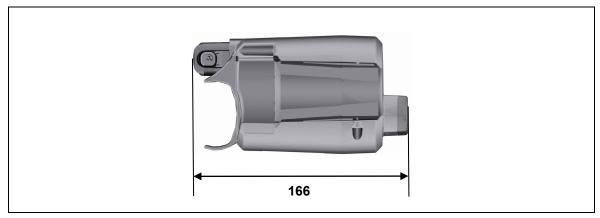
Dimensions of the MC11 control unit, side view (in mm)
